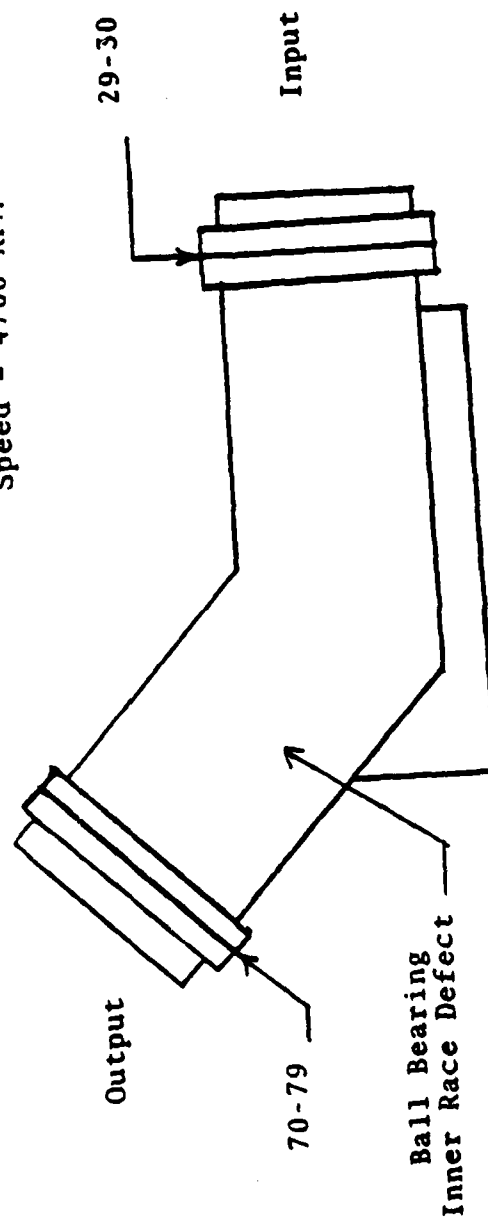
42' GEARBOX IMPLANT MAIC - 011 SPADE READINGS (TEST CELL)
